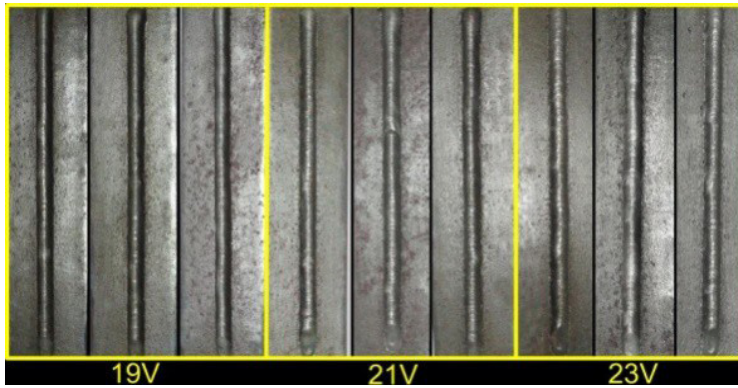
Weld beads resulting from the process with Ar+25%CO₂ shielding gas.
